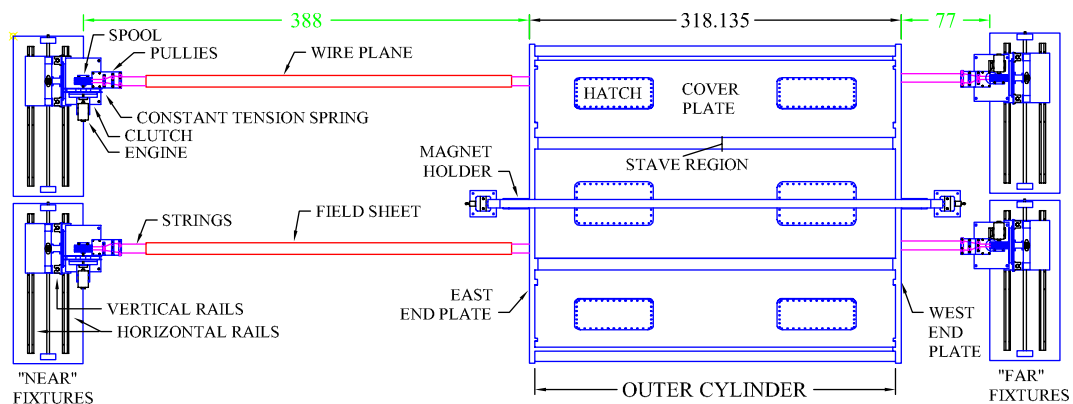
An overhead view of the COT Can in position for stringing the wire planes and field sheets. Components of the outer cylinder are labeled and the nominal distance between the outside surfaces of the end plates is indicated. Figure 7 details a region where the cover plate and stave are screwed to the end plate. Dimensions are in cm.
